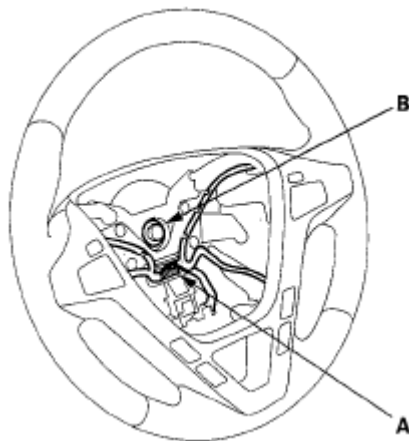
Identifying Cable Reel Subharness Connector And Steering Wheel Bolt
